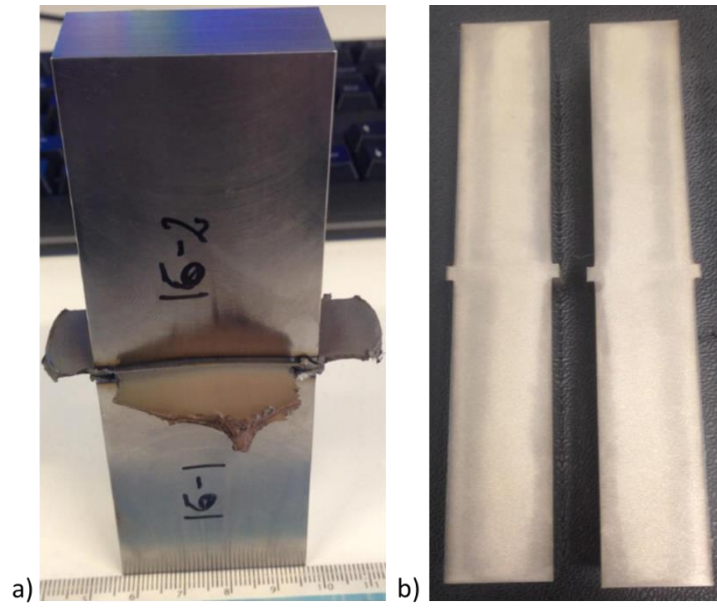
Ti-6Al-4V linear friction weld a) before EDM cut and b) after EDM cut
